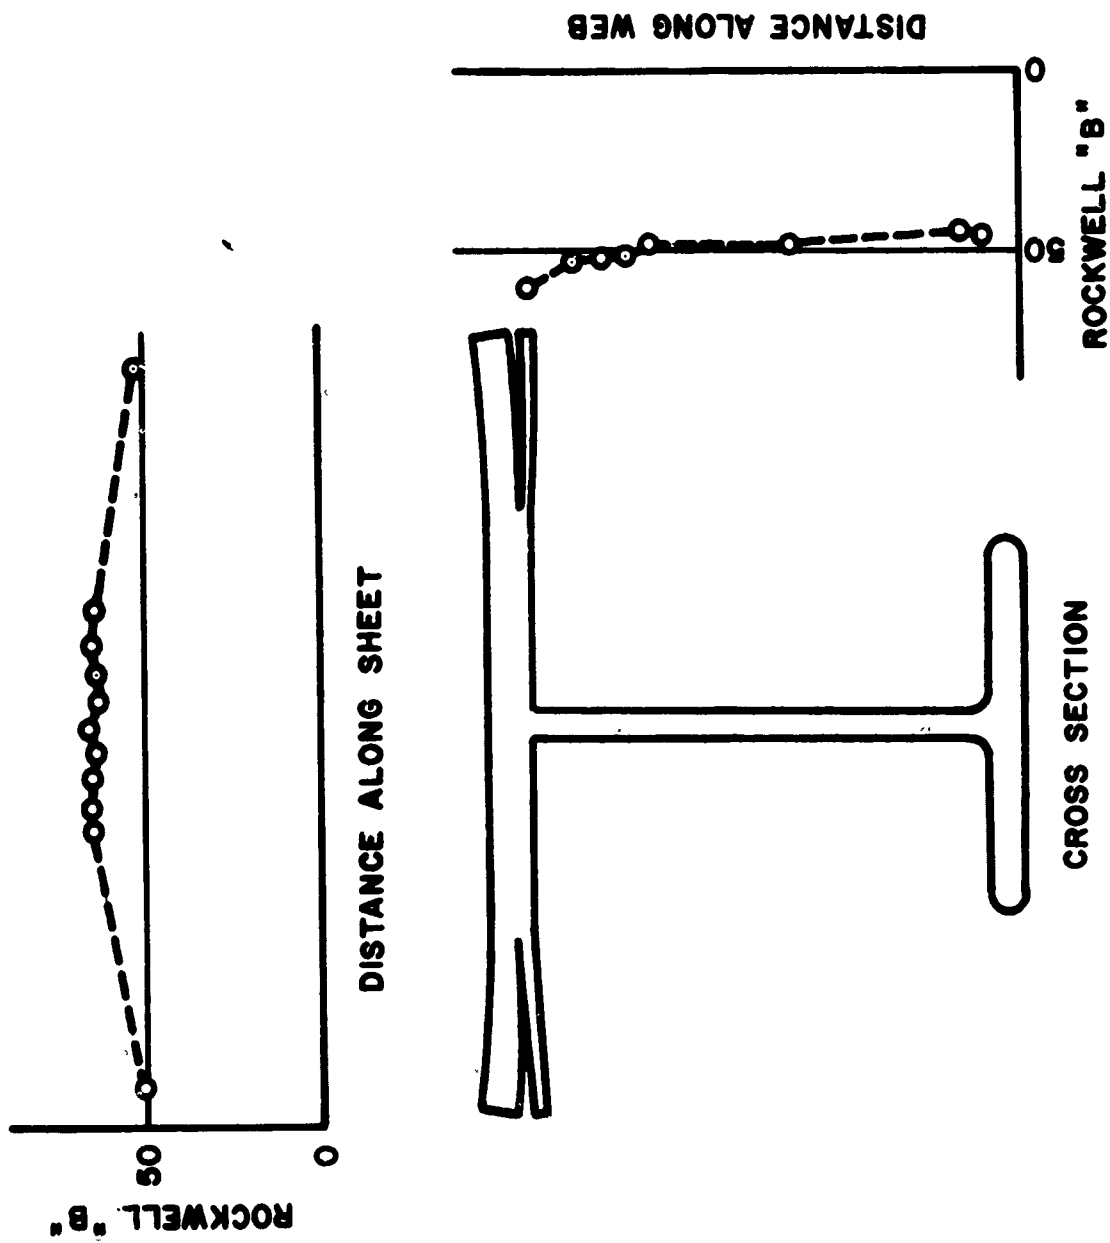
HARDNESS-EXPLOSION WELDING
